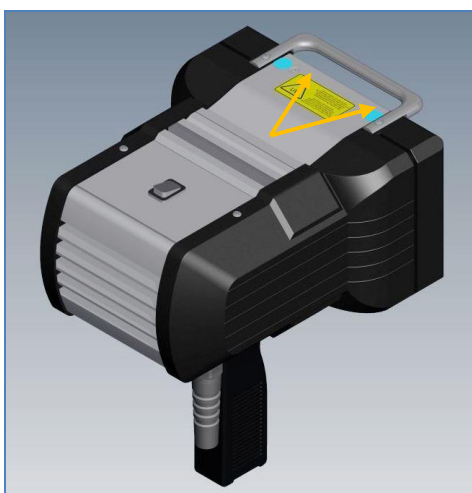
Fixing screws for safety glass unit (top side and underside of the housing)
